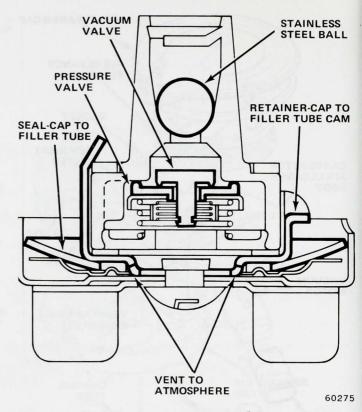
J-4 Filler Cap with Rollover Check Valve—Typical
